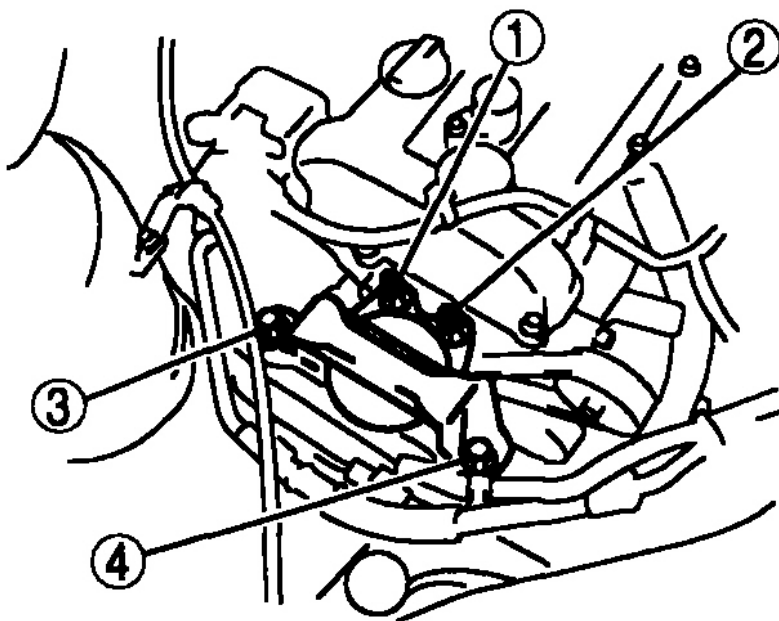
Tightening Stud Bolt Of No. 3 Engine Mount Bracket](#)
